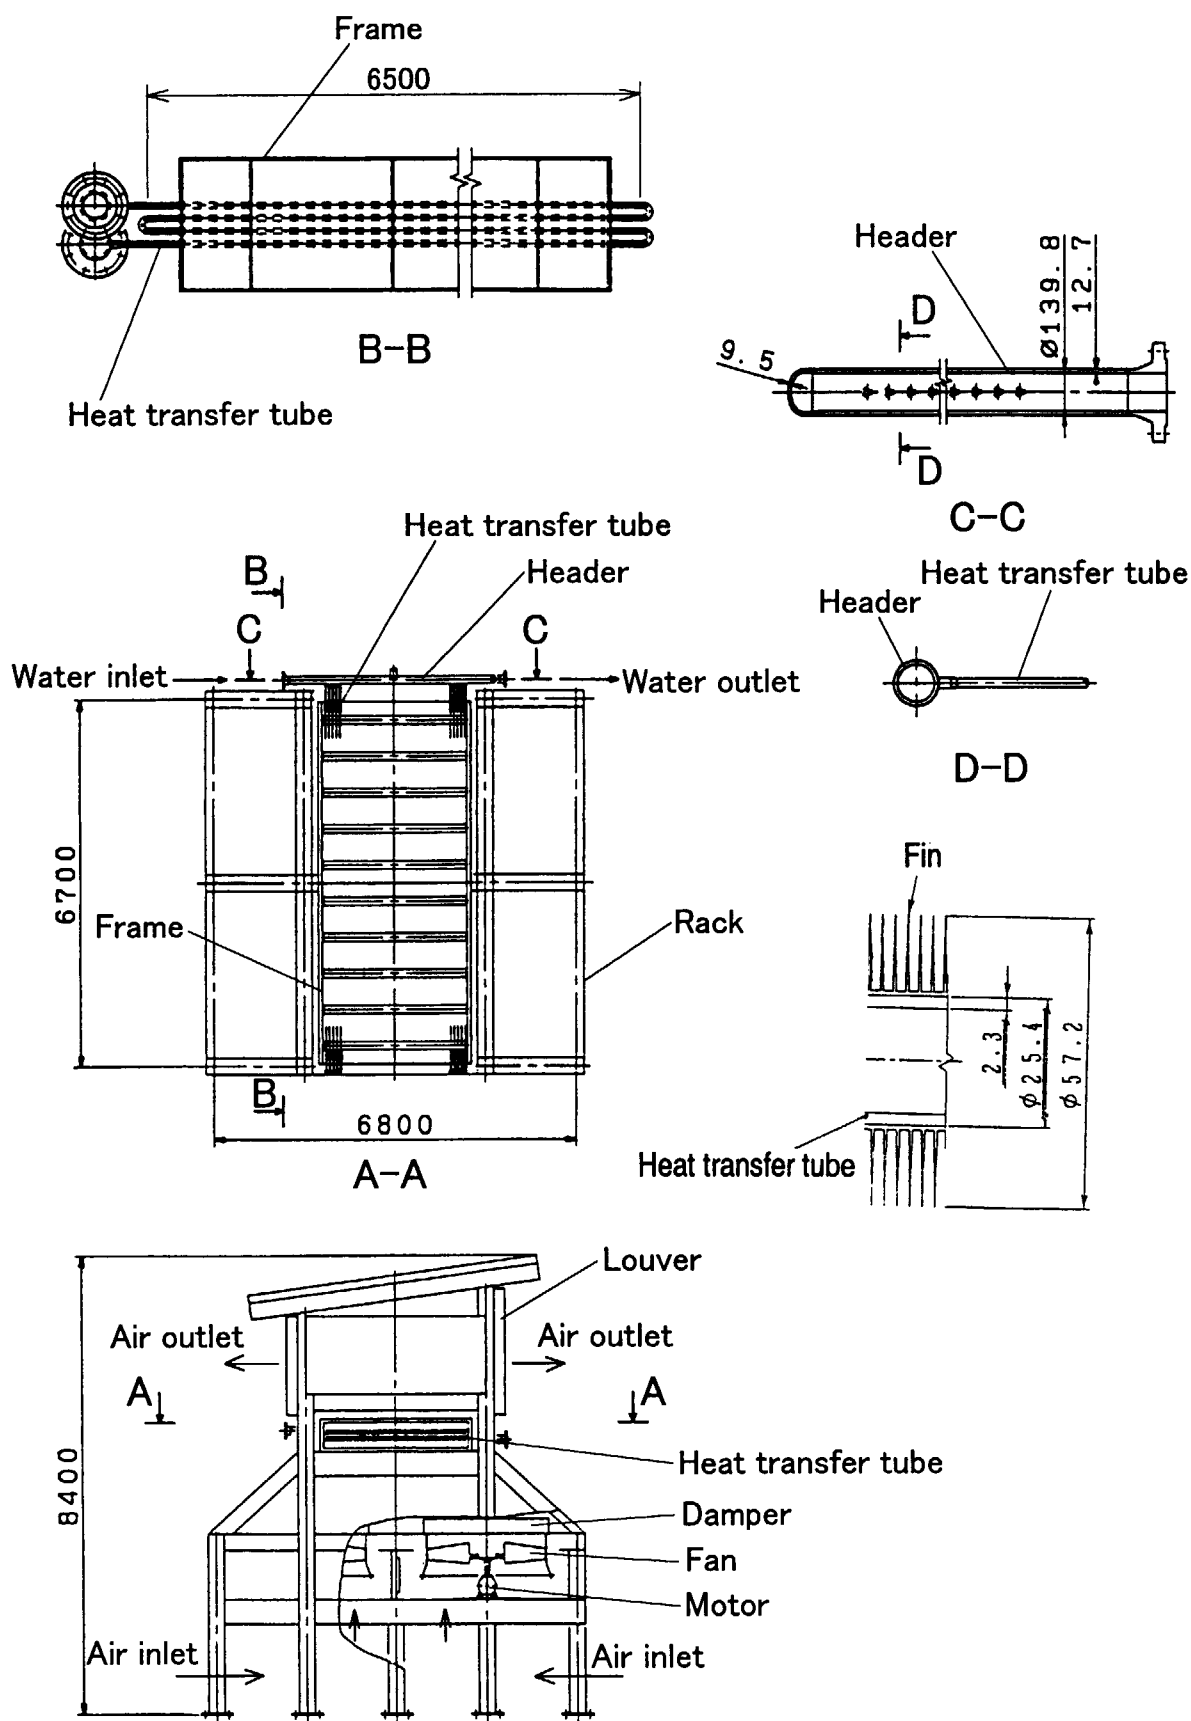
Structural drawing of air cooler for auxiliary cooling system
